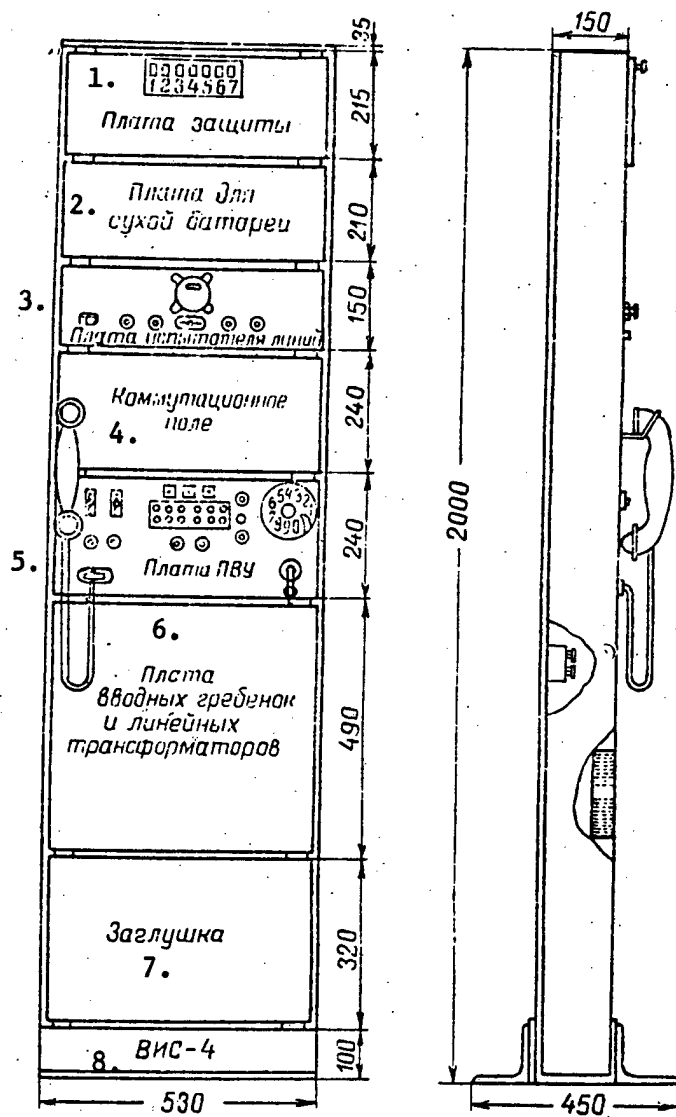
The equipment layout in the VIS-4 input-test rack.
